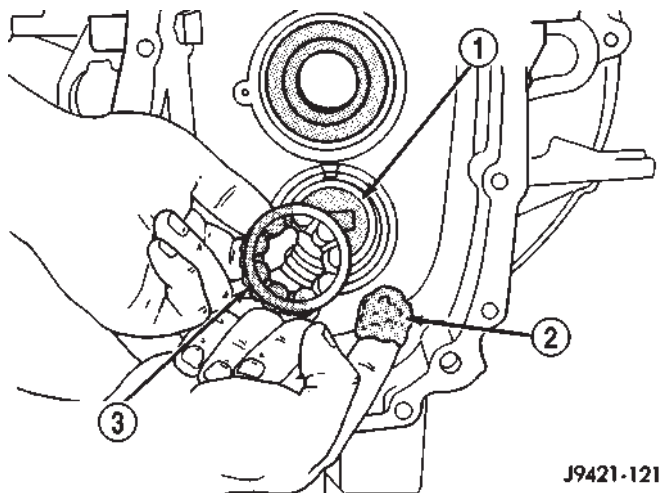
Input Shaft Bearing And Countershaft Front Bearing
